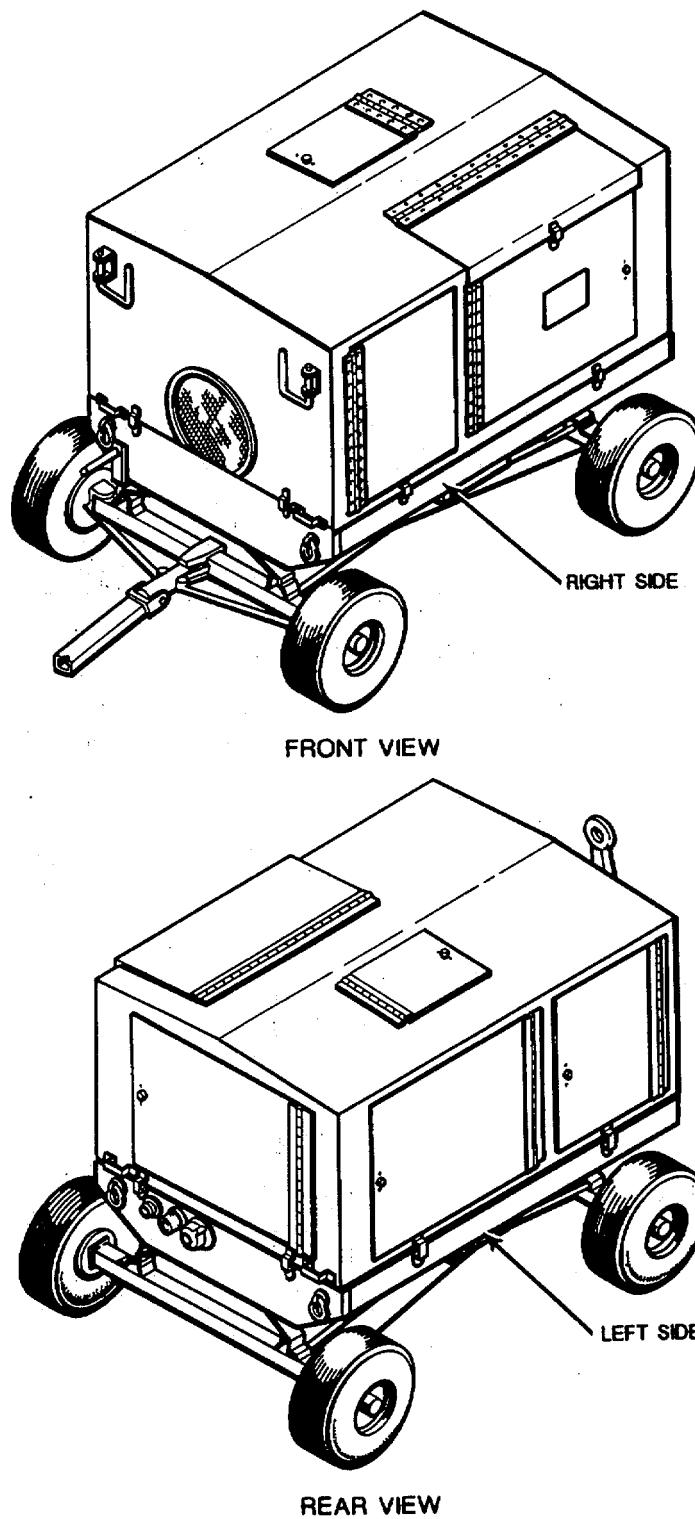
Test Stand Hydraulic System Electric Motor Drive, Type-D-6A
